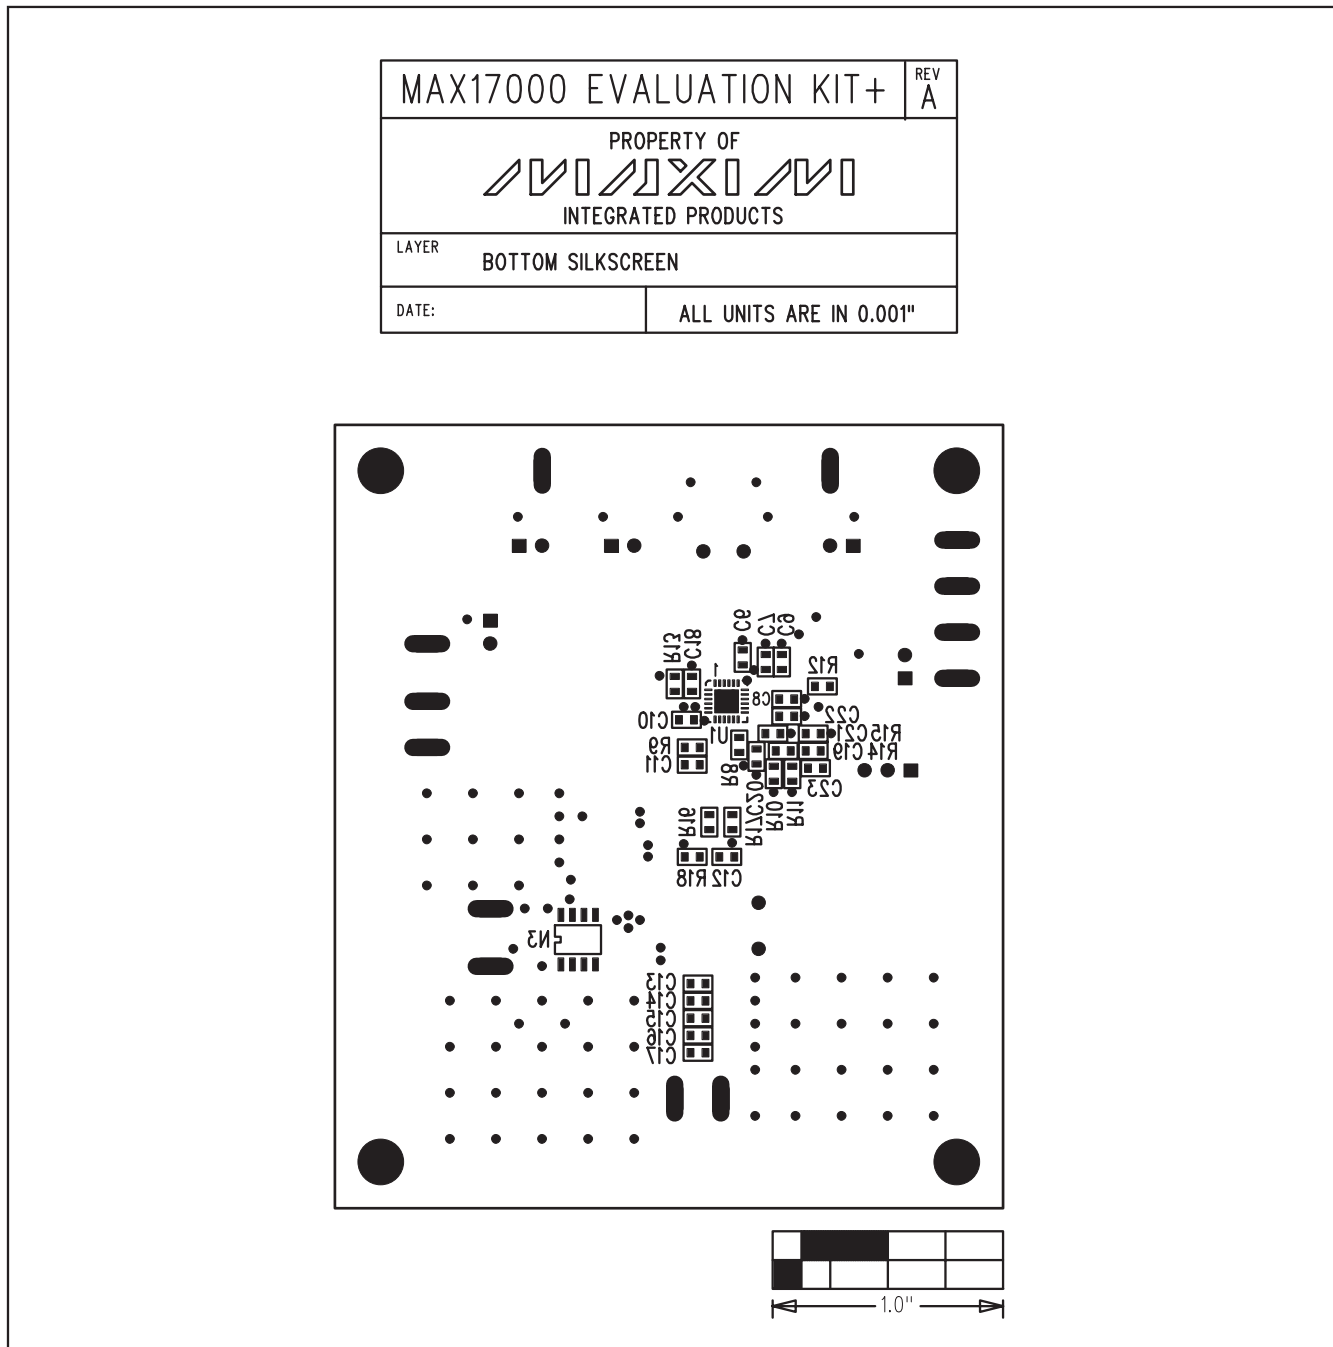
MAX17000 EV Kit Component Placement Guide—Solder Side
